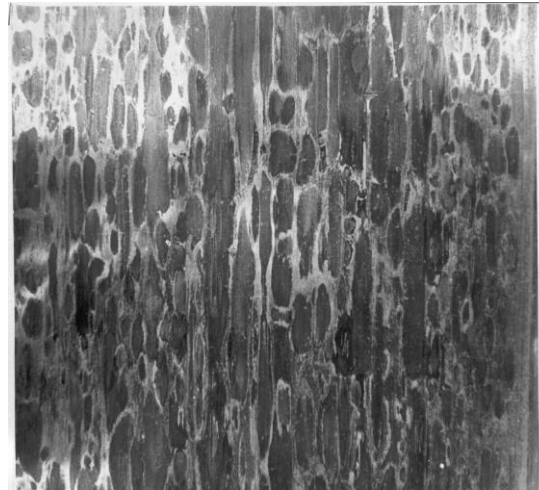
The surface of the brake pulley of the band-shoe brake of the draw works, worked out in severe conditions
